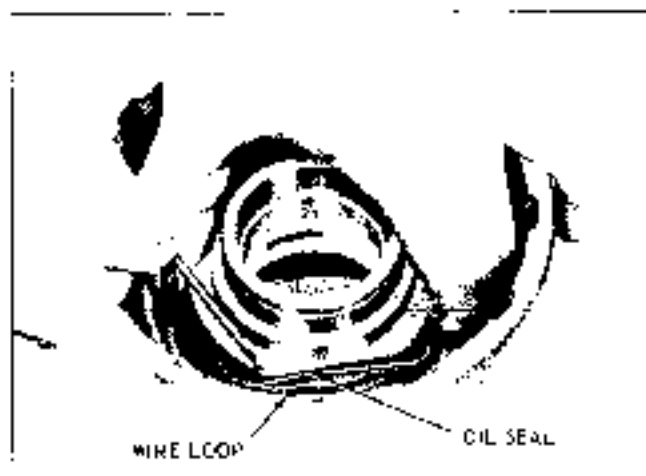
F-53 Installing Clutch Piston Inner Oil Seal
